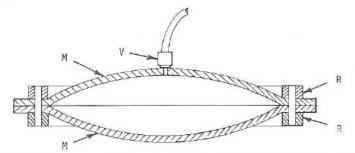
Fluid admitted under pressure through valve V inflates sheet metal M held between clamping rings R.
